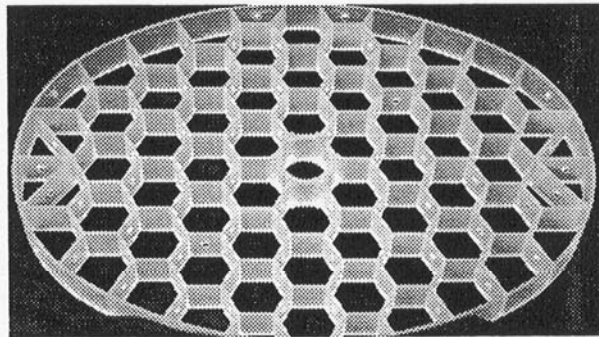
Intricate ULE Core Geometry Machined by AWJ Process
